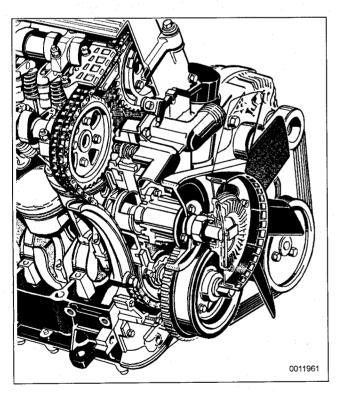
M44 engine valvetrain chain drive. M42 engine is similar.
